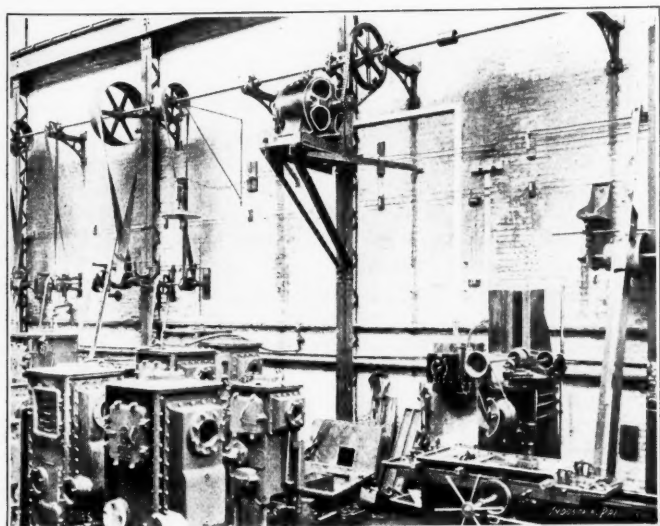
Line Shaft Driven by 15 H.P. Motor and Renold Silent Chain.
